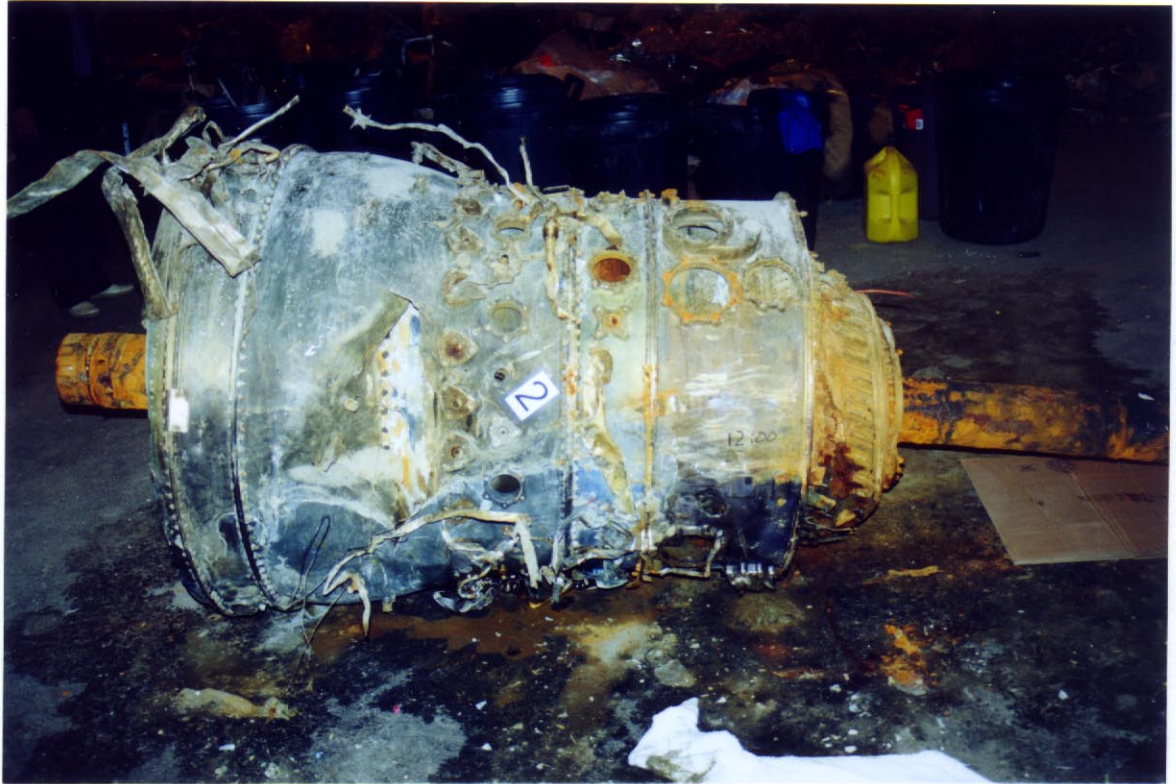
View of right side of No. 2 engine HPC, diffuser/combustor, and HPT cases.
